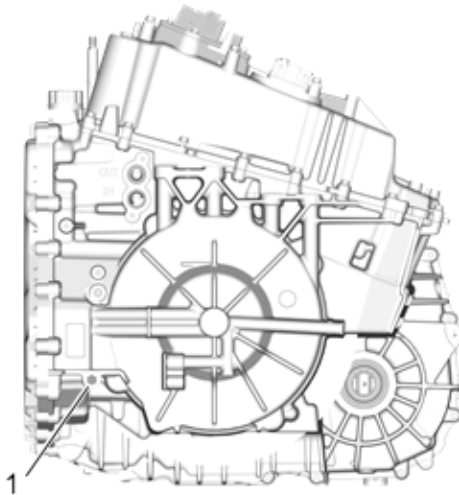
Transmission Fluid Pressure Test Hole Plug
